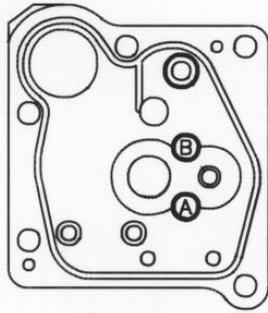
Outline Drawing of Typical EG-P Actuator (Oil Motor Model)
